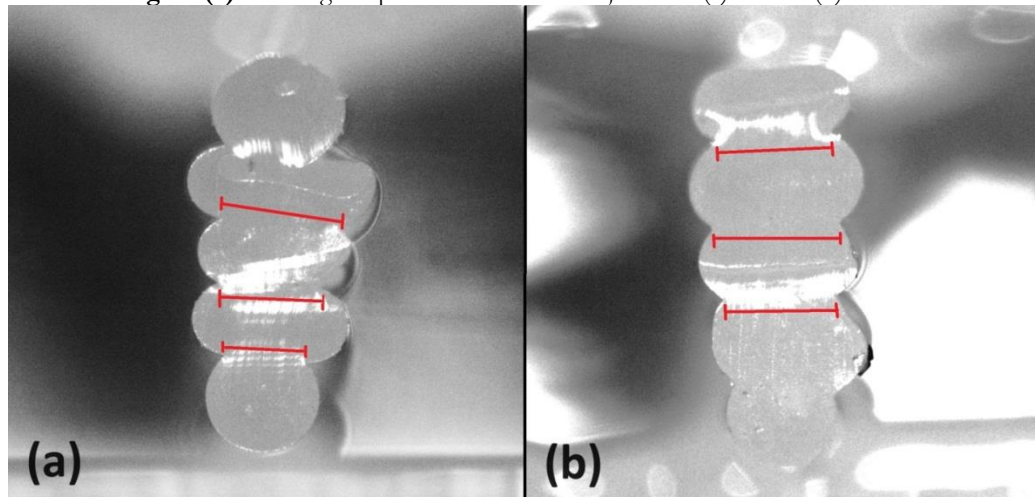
Cross-section view of specimen printed with (a) 210 °C and (b) 230 °C.
